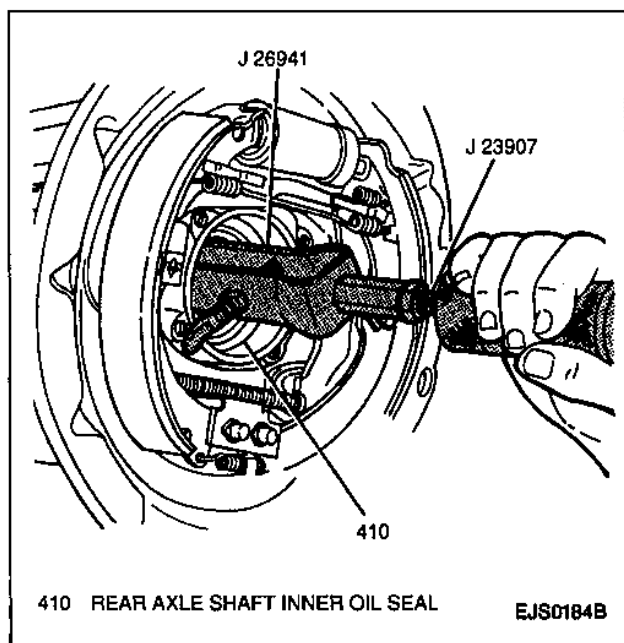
Removing Rear Axle Shaft Inner Oil Seal
